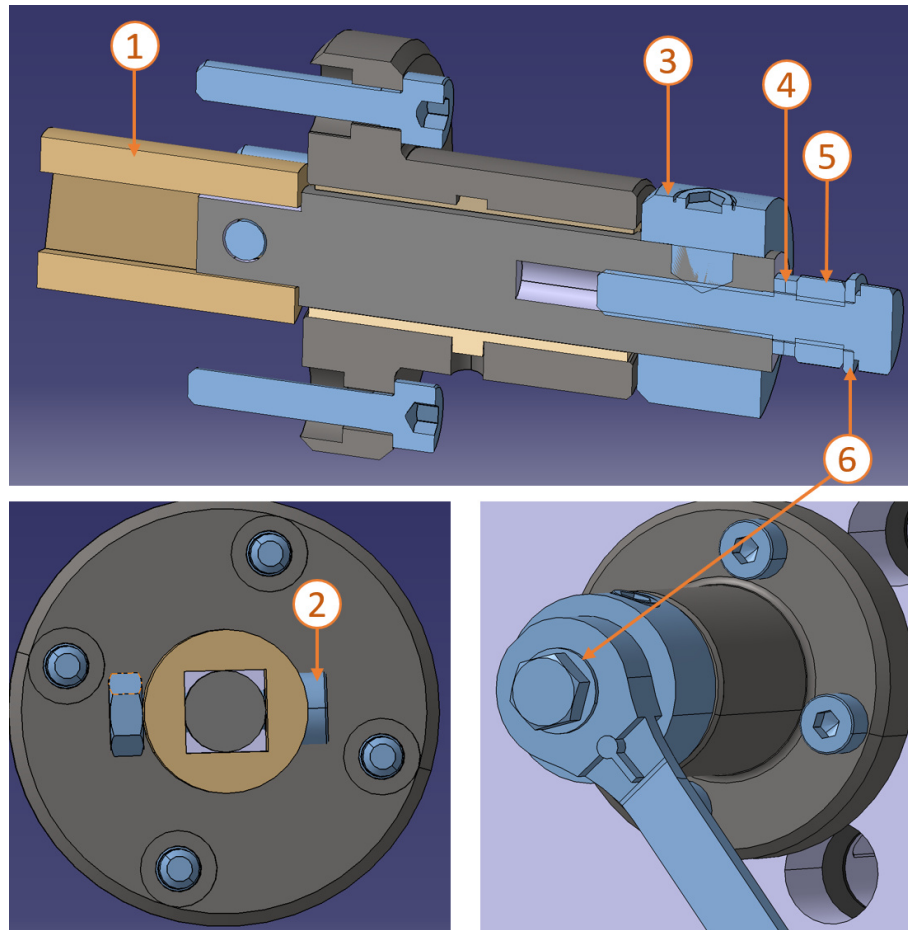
Normal and sectional view of the short version of the lever interface assembly. Square socket attachment (1), locking screw (2), adjusting ring (3), ISO 7092 washer(4), M5 nut (5), ISO 7090 washer (6).
